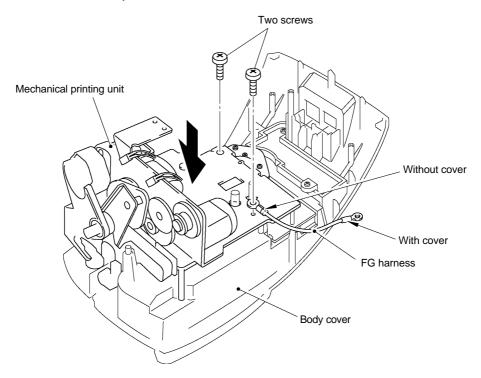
Reassembly of the Mechanical Printing Unit
